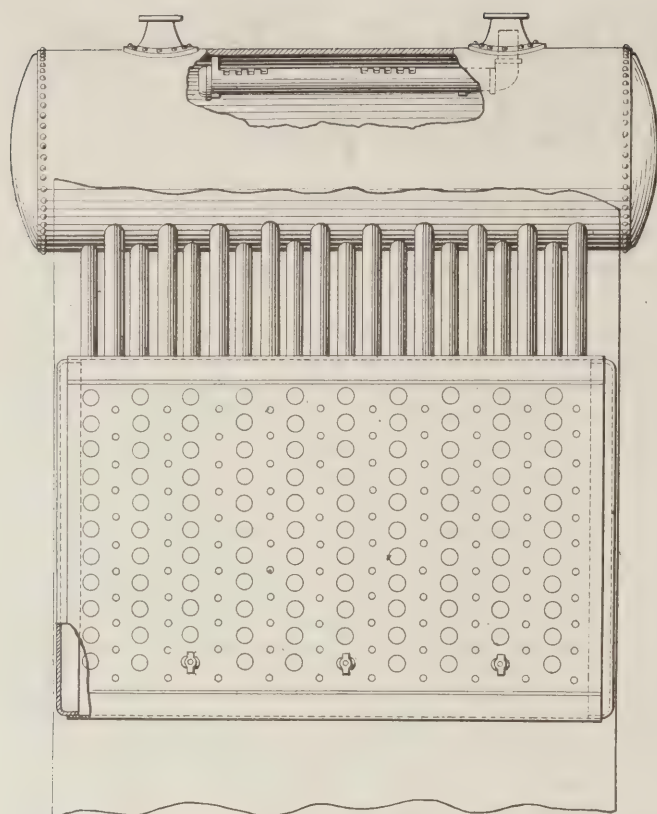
ELEVATION OF ONE DRUM, THE TUBES AND WATER LEG
